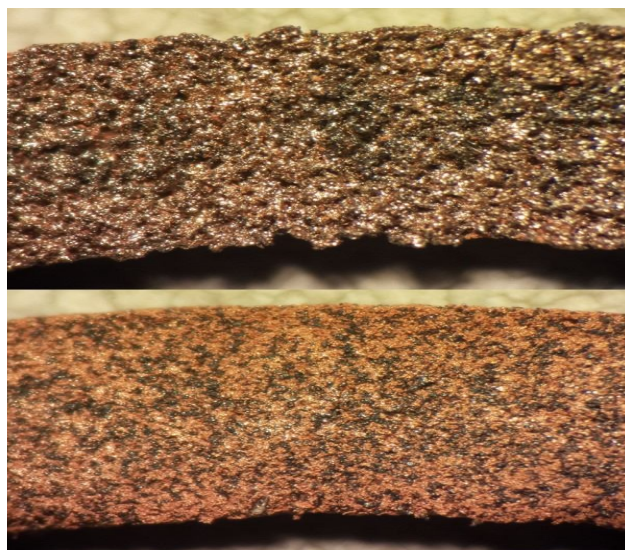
Optical view of upper and lower sides of No. 11 sample
